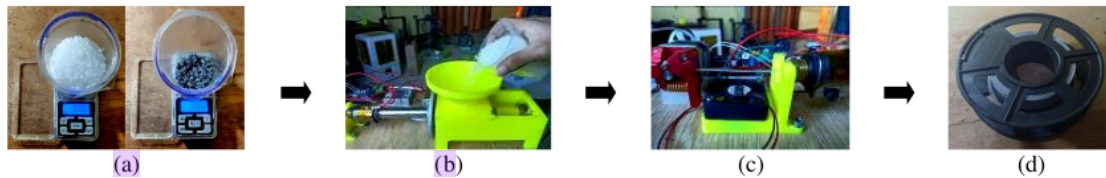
(a) PLA and PCL Pellets (b) Pouring (c) Extrusion Process (d) PLA and PCL Pellets blend
